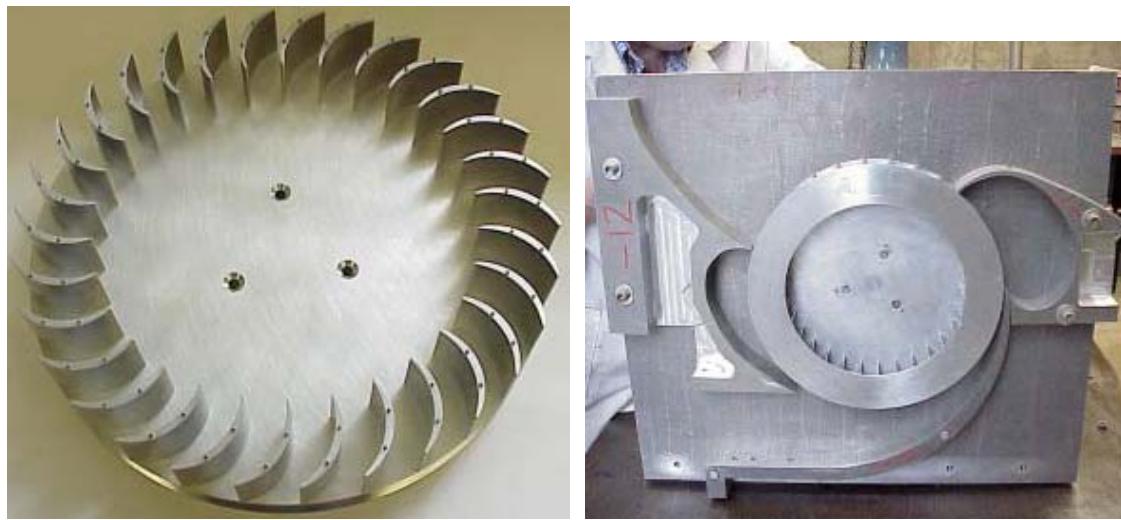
CFF assembly (a), Partially assembled 30 bladed rotor and (b), Partially assembled rotor housing. From [7]
